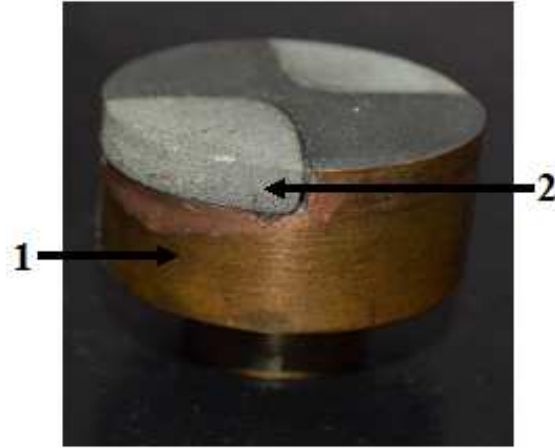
Photographic view of 3rd developed Hybrid Electric Discharge Machining Electrode
